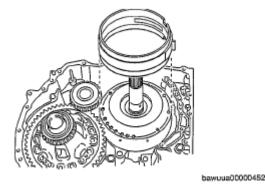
Identifying B1 Brake Band Of Transaxle Case Courtesy of MAZDA MOTORS CORP.
